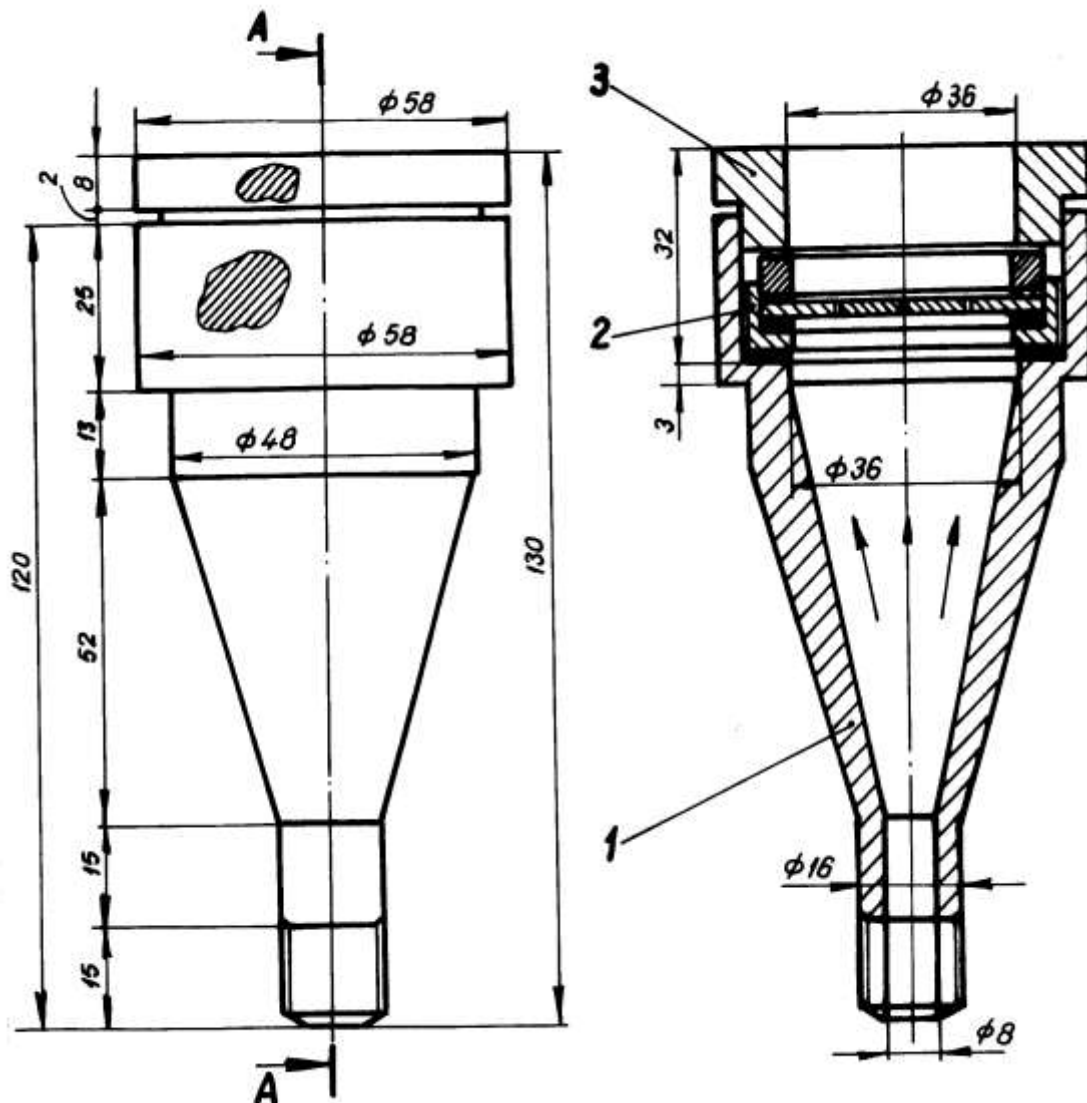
The FBG body: a – view; b – transversal section view. 1- truncated cone body with inferior threaded part; 2 – seal; 3 – casing; 4 – tightening nut.
